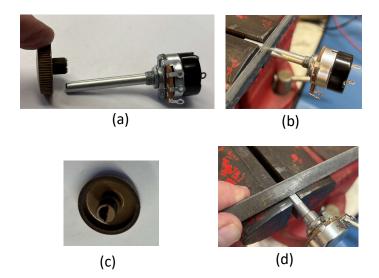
Cutting potentiometer shafts. (a) Make sure to measure how far the shaft extends into the knob. (b) When cutting the shaft, clinch the <u>discarded</u> end in the vise. (c) Example of a knob with a flat side. (d) Make sure to file only what is necessary – otherwise press-fit knobs can slip off.
